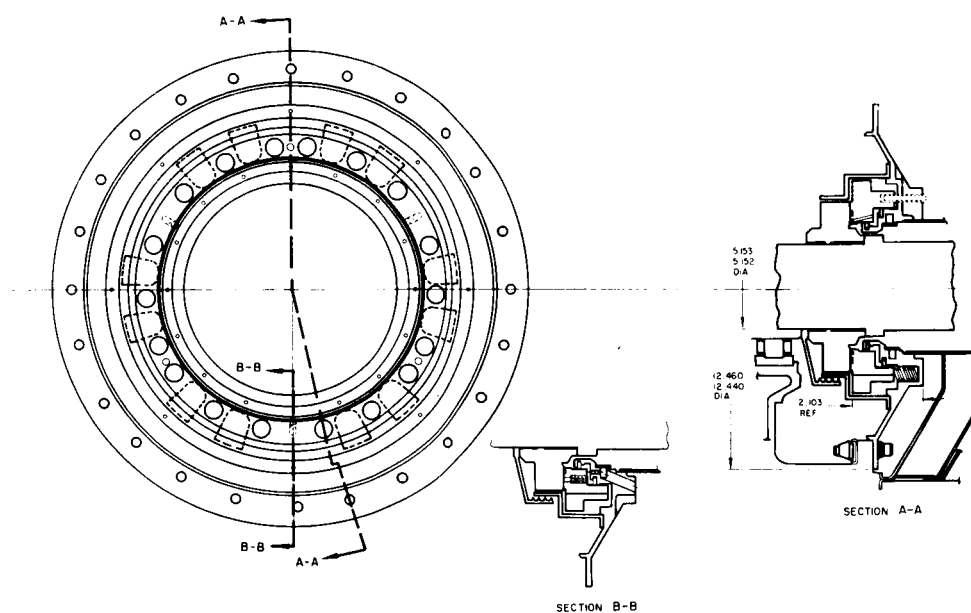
Externally Pressurized Hydrostatic Seal Assembly (Stein Seal Co. No. 2991-P1)
